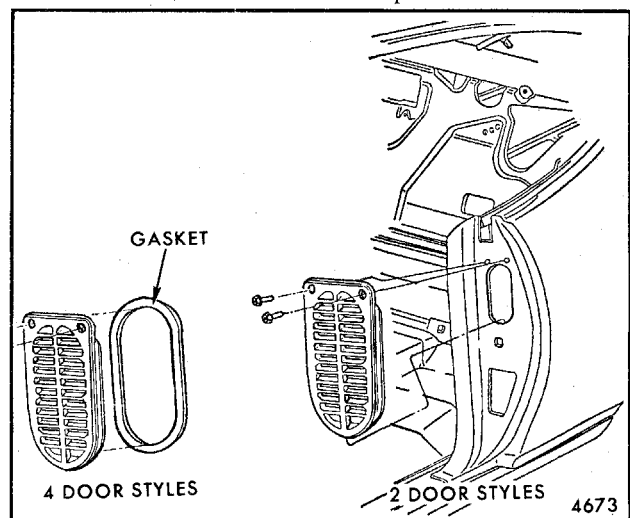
Pressure Relief Valve - "A,B,C,E, X-27" (Formal Roof) and "X-69" Styles
